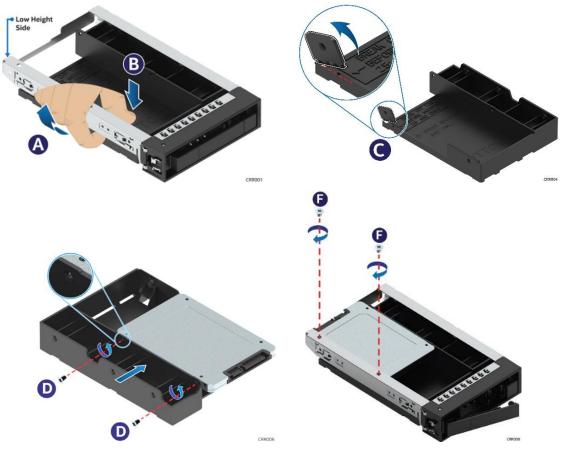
Mounting a 2.5" SSD to a 3.5" drive carrier
